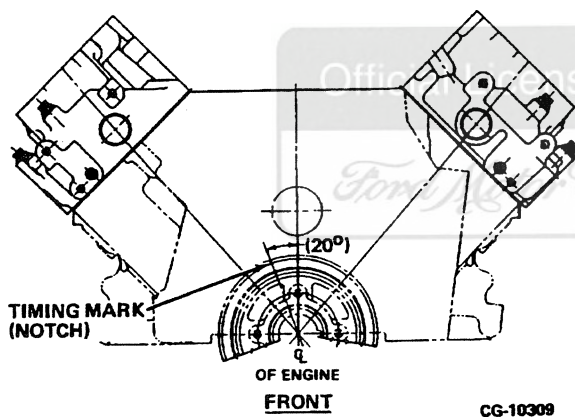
Engine Crankshaft Vibration Damper Timing Mark Positioned at 11:00 (20° from Vertical) for Valve Lever Post Bolt Torque (Damper Behind Pulley)
